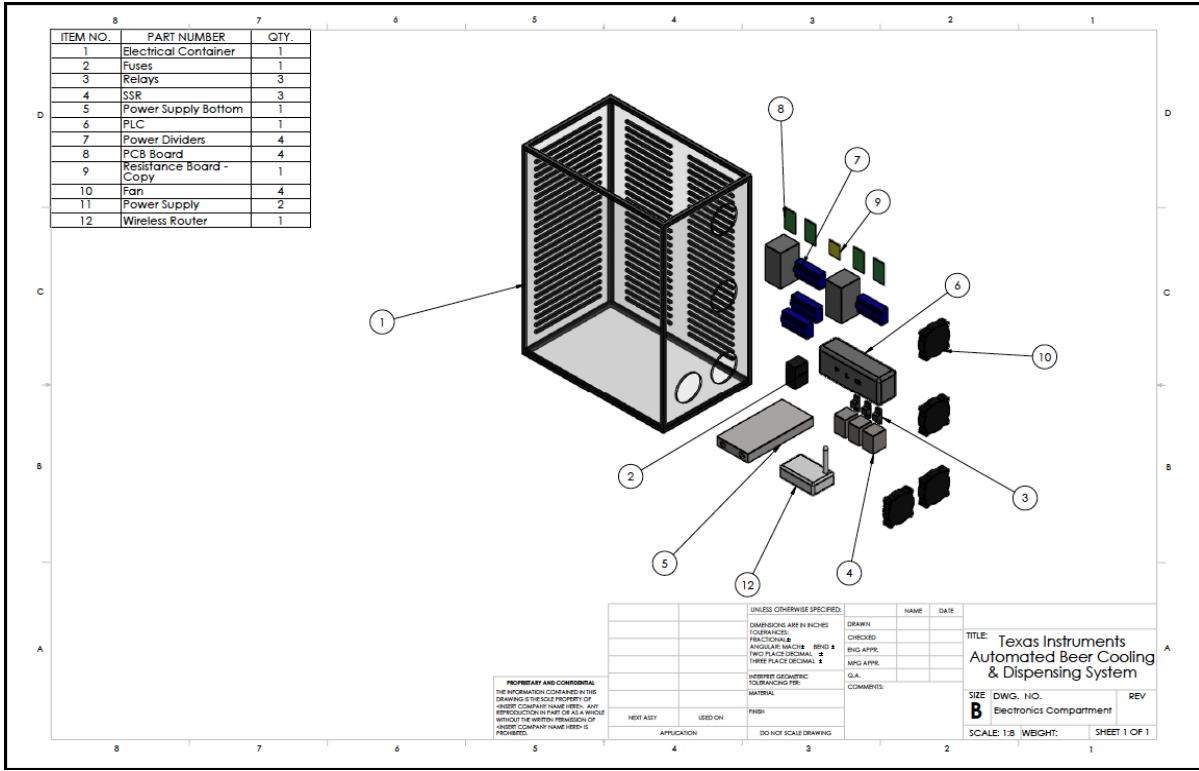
SolidWorks Drawing of Electronics/Control Panel Compartment Assembly
